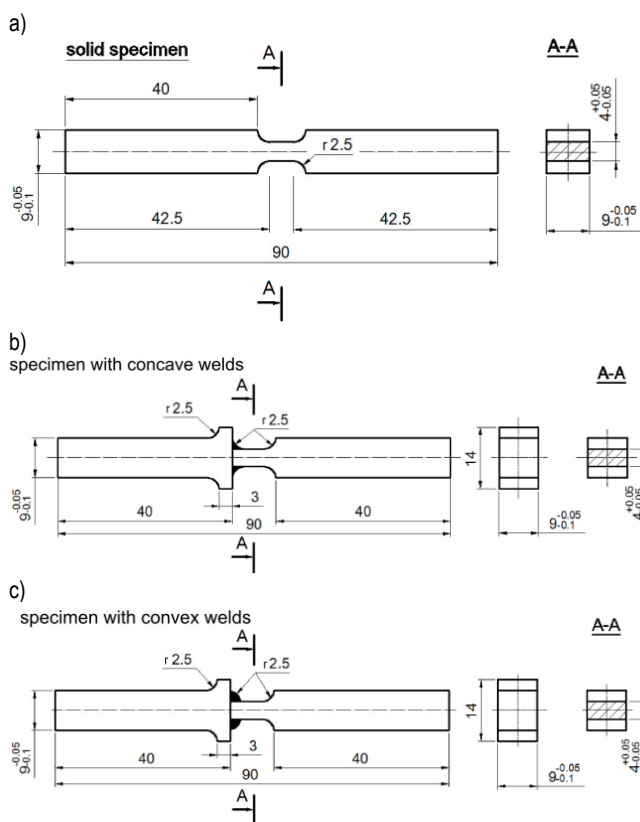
Shapes and dimensions of specimens: (a) solid specimen, (b) specimen with concave welds, and (c) specimen with convex welds, dimensions in mm
